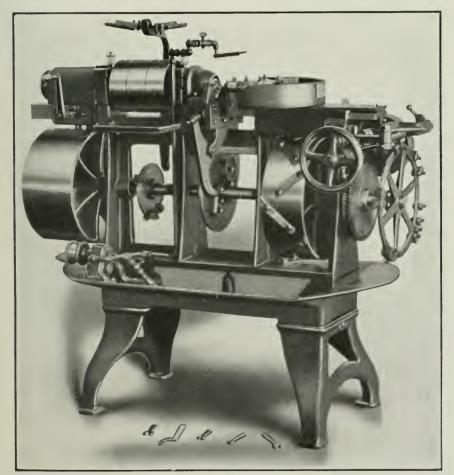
Pratt & Whitney Automatic Serew Machine $\frac{3}{3}$
